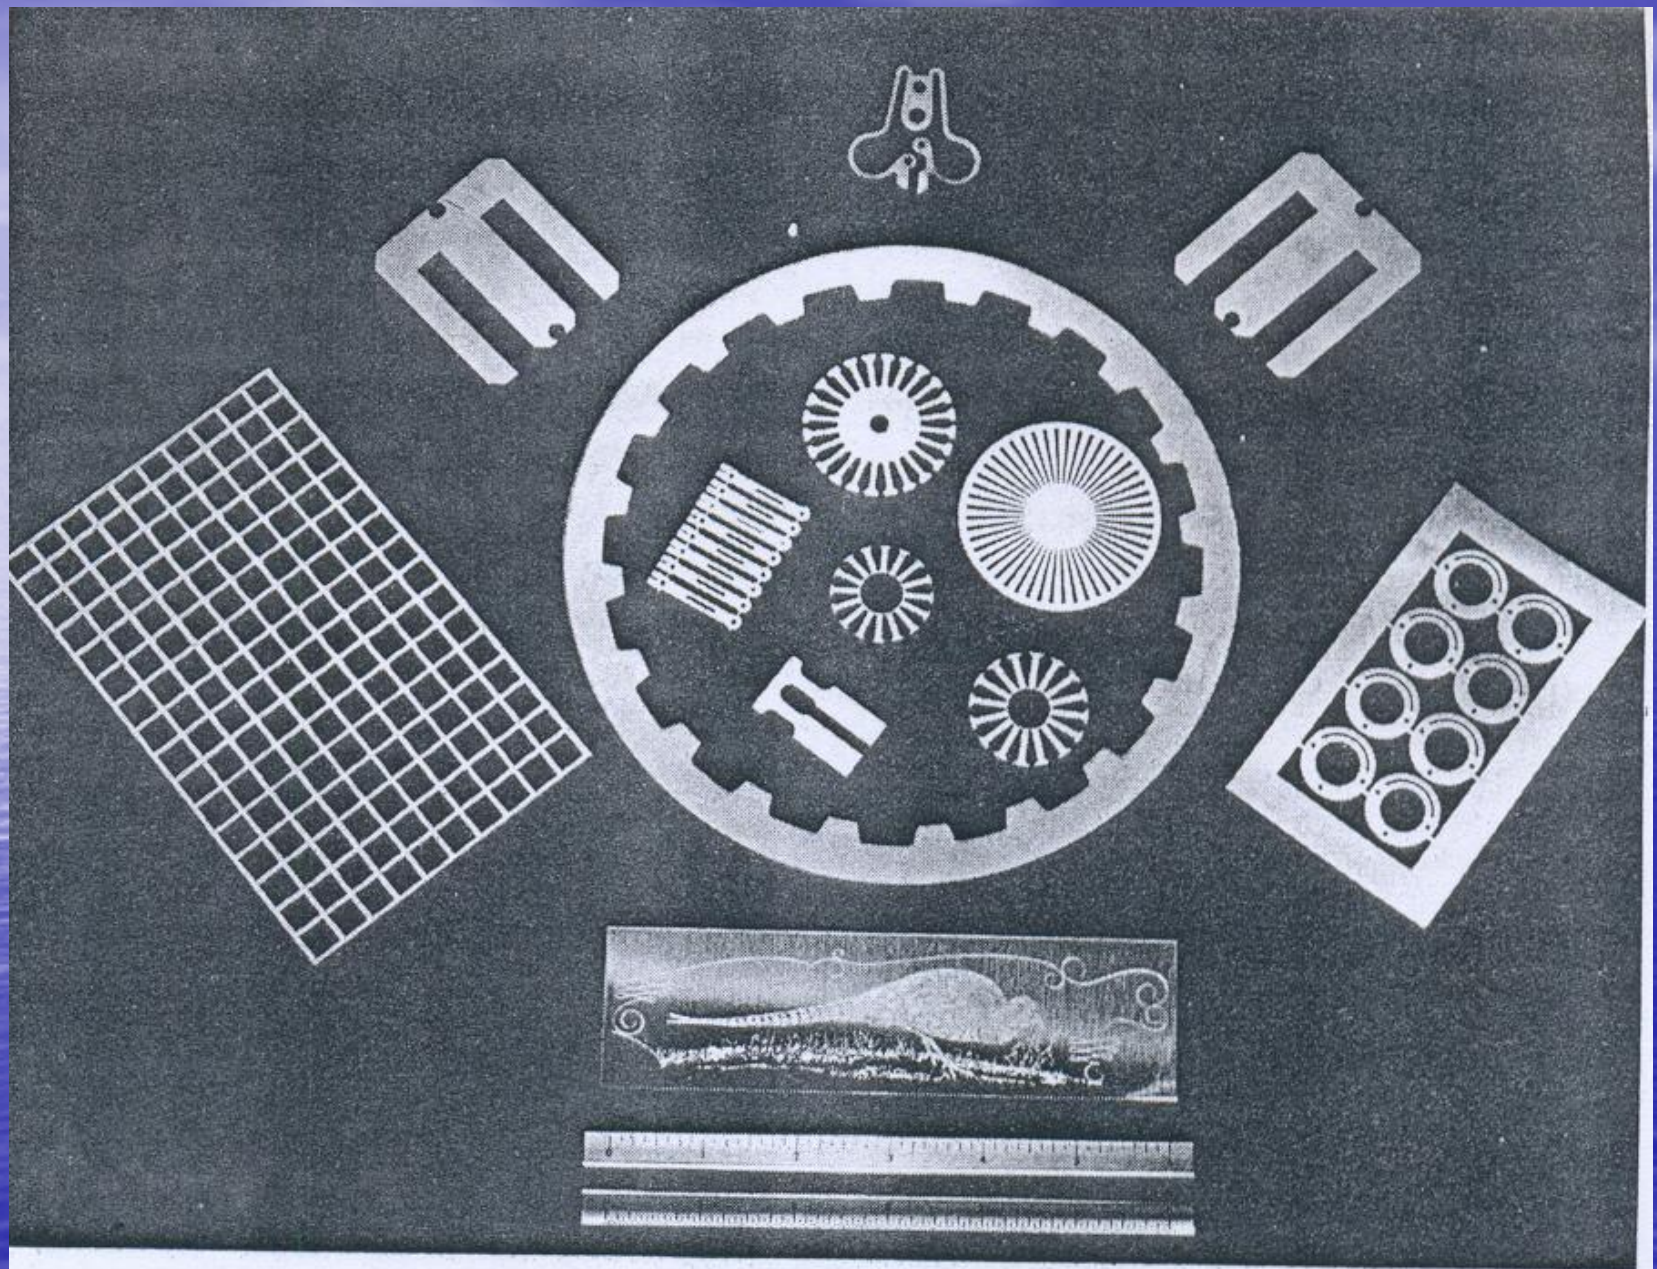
Parts produced by chemical blanking. (Courtesy, Chemcut Corporation)
